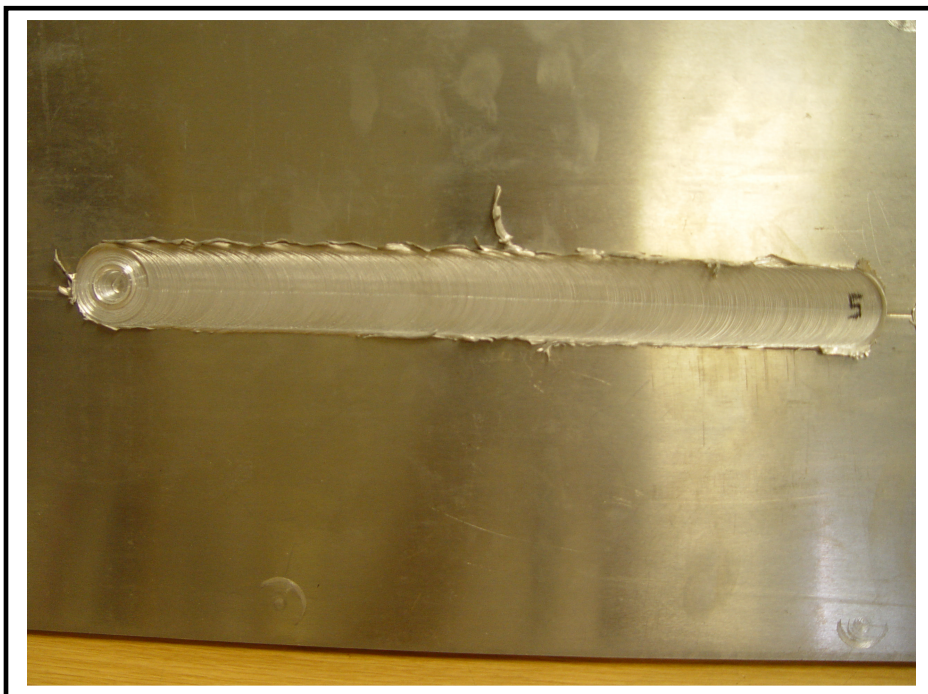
FSW-weld (5083 alloy and Tool 2).
